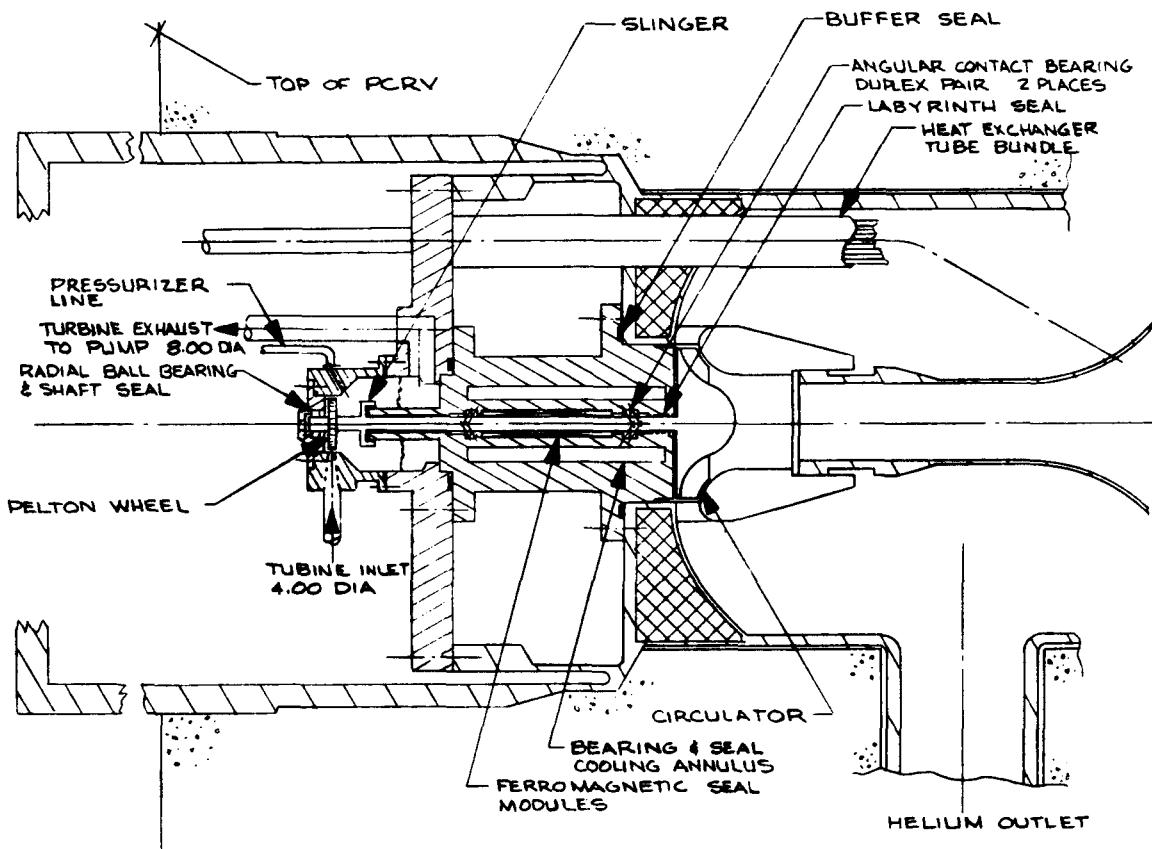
Hydraulic turbine drive, 2-wheel concept
